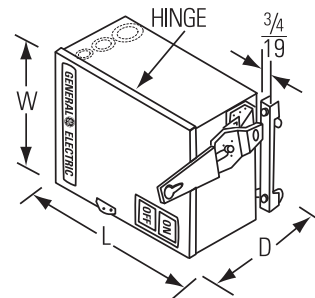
Figure B: Door hinges top. All dimensions are shown over largest part of plug.
